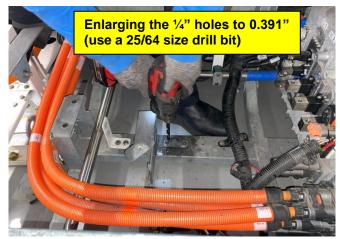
Use drilling template to drill 1/4" size holes then enlarge holes with a 25/64" size drill bit
